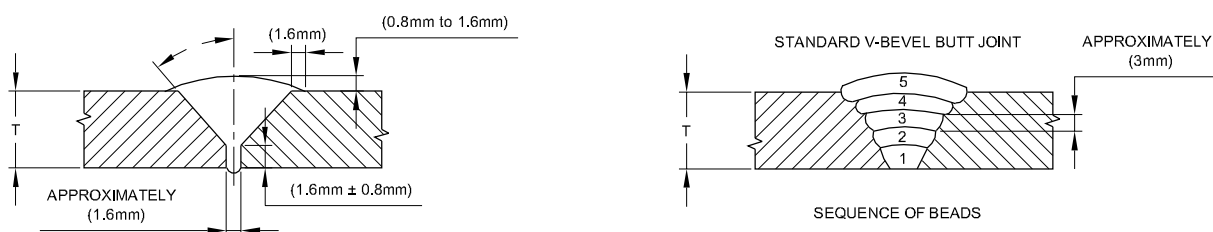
joint design and sequence of weld beads in WPS format
